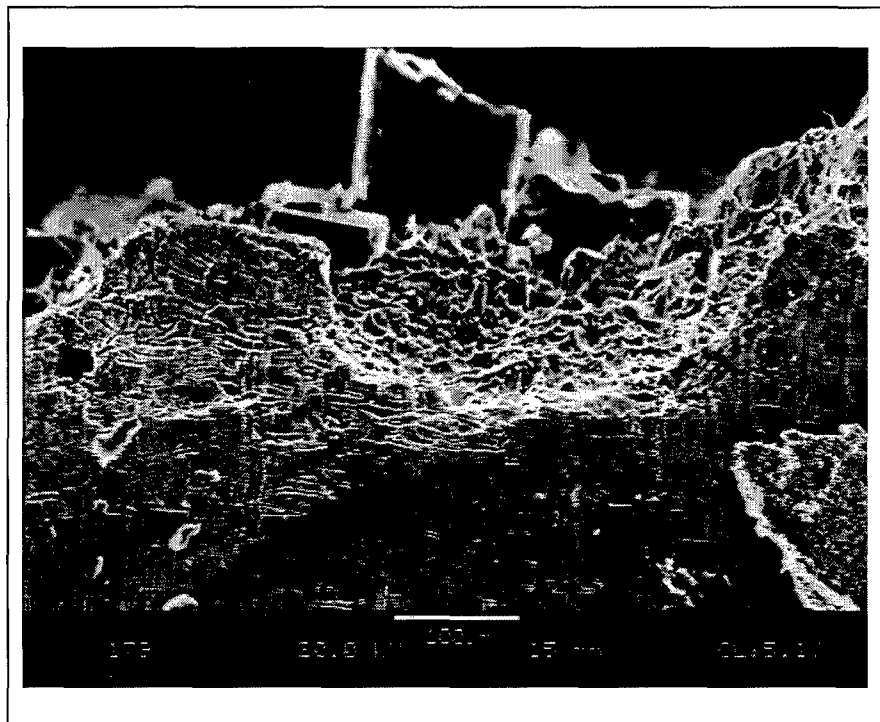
Welding Site (Brittle Fracture)
